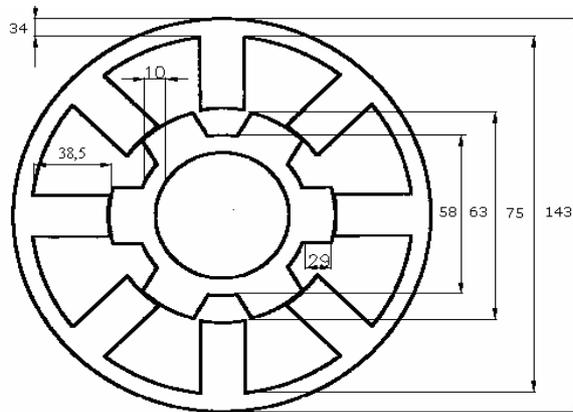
Iron sheet package view and measurements (mm) of a 1.5 kW, 380 V, 150 rpm, 8/6 pole SR motor.
